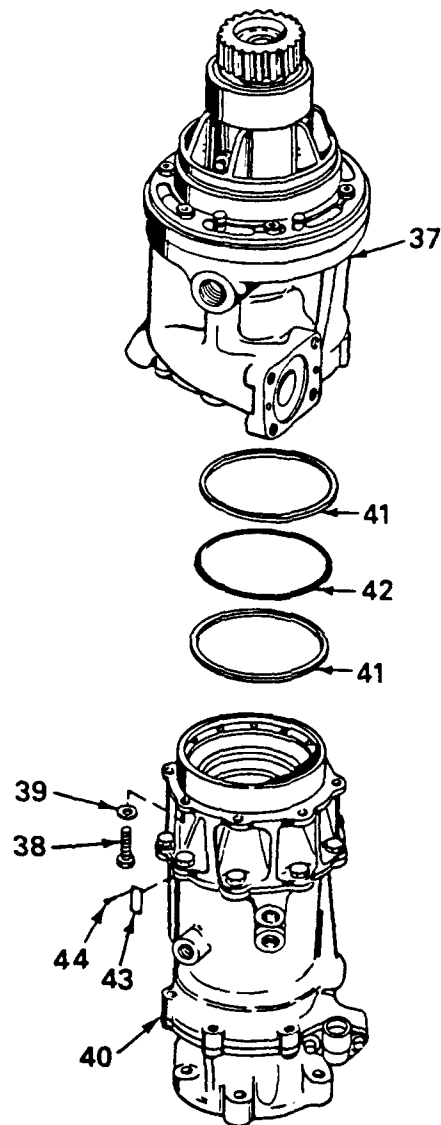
Exploded View of Fuel Pump Assembly (Sheet 1 of 3)
